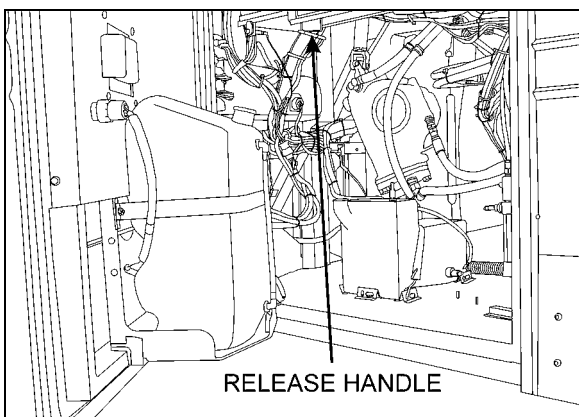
FRONT BUMPER RELEASE HANDLE 18613
